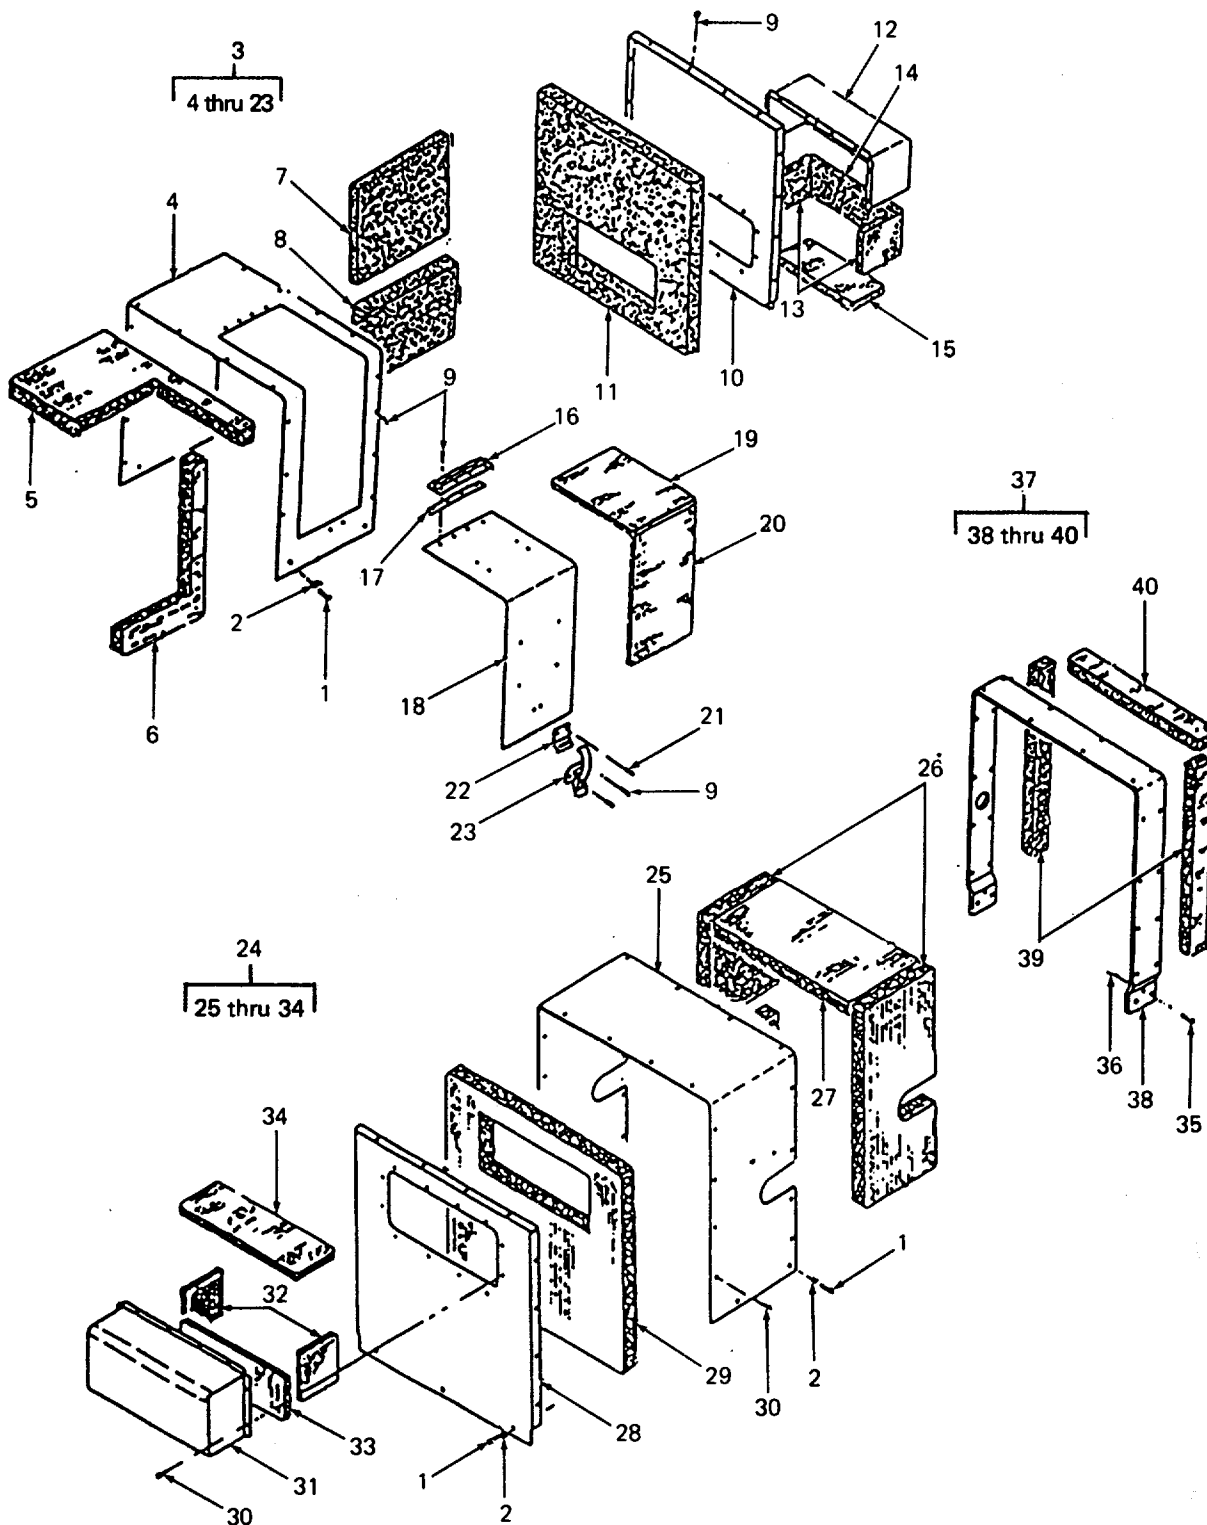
Inlet/Outlet Air Sound Enclosure Assembly
